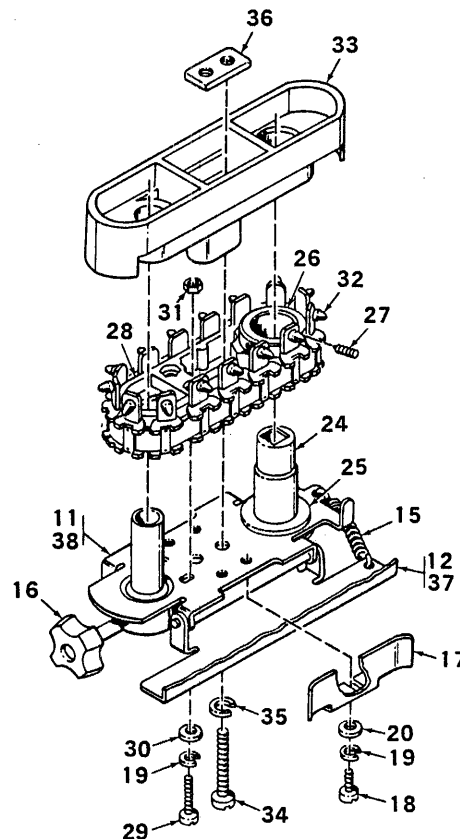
REMOVAL OF BELT (32) IDLER SLIDE (28), AND DRIVE PULLEY (26)
